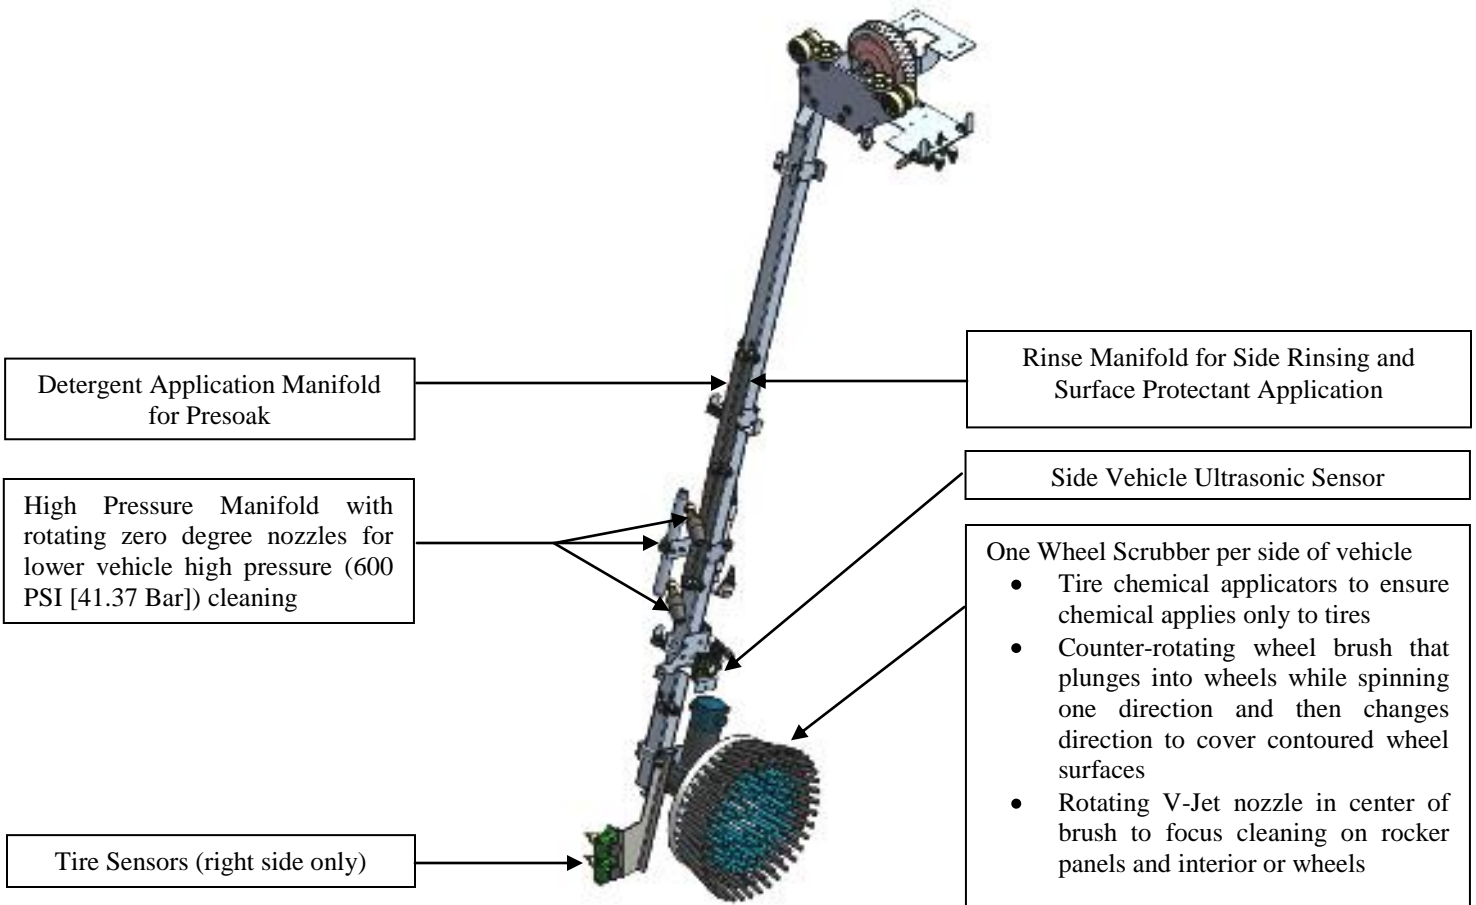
Advanced Wheel Scrubber with High Pressure Blaster Components.
